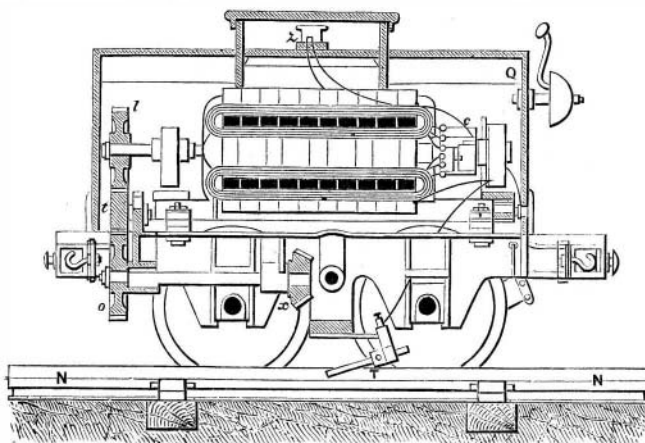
LONGITUDINAL SECTION OF MOTOR.
